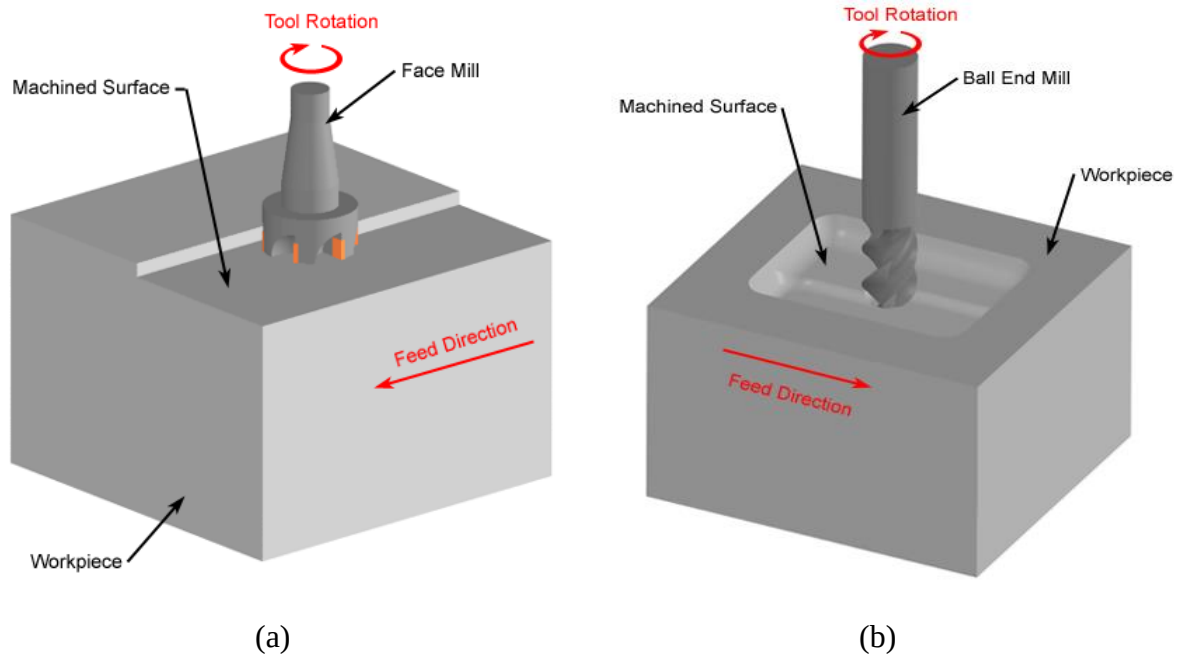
Representation of milling operations: (a) Face milling, (b) End milling [2009Url]
